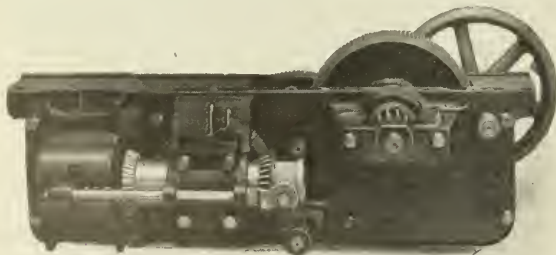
Opposite Side of Lathe Apron, showing Arrangement of Gearing
